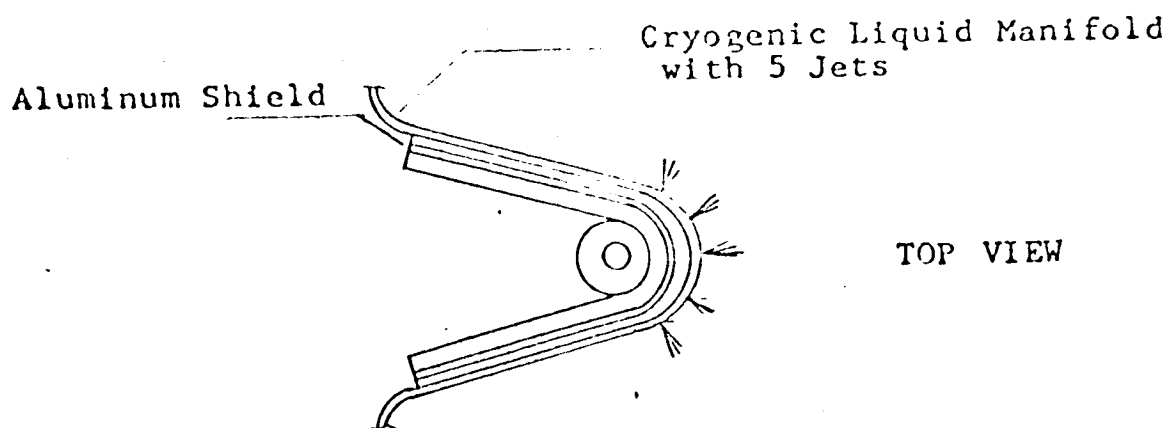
Jet System No. 8 for Front Side Chilling of Weldments using a Cryogenic Liquid — Traveling Shield with Metallic Wool Seal - 5 Jet Manifold
